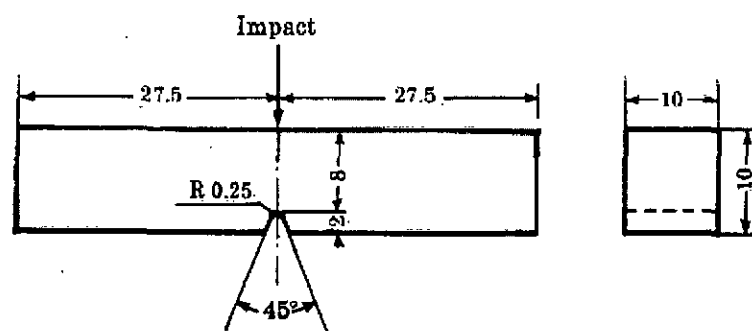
Dimensions of Charpy V- notch impact test specimen (all dimensions in mm) [166]
